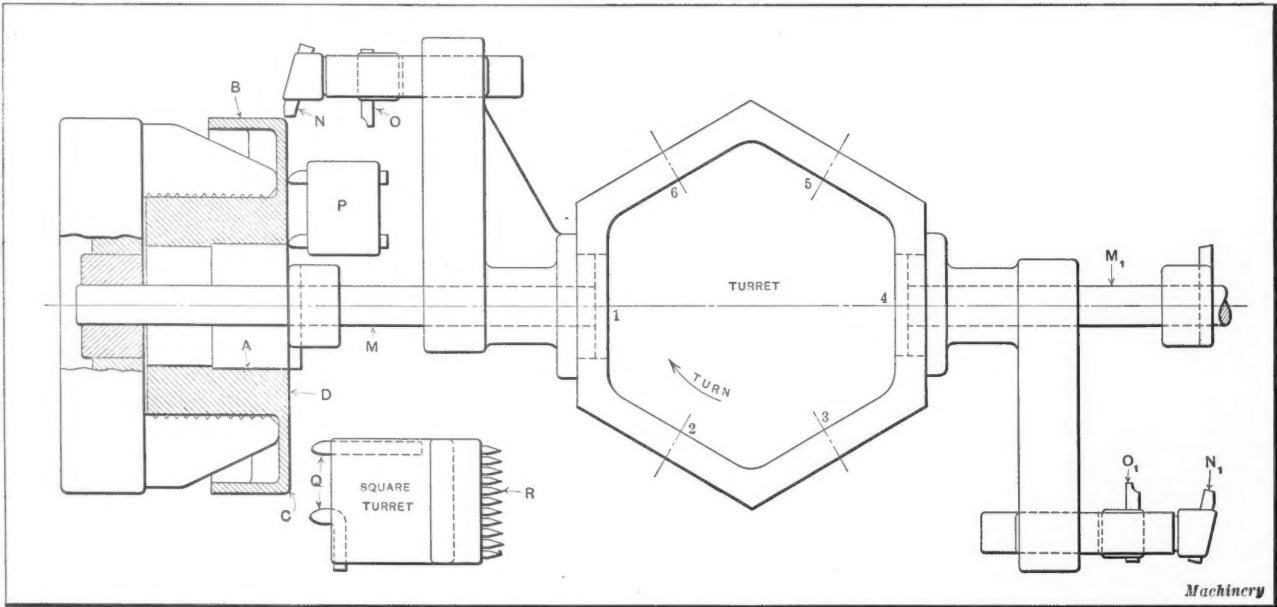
Equipment used in the First Operation on the Chuck Body shown in Fig. 17
